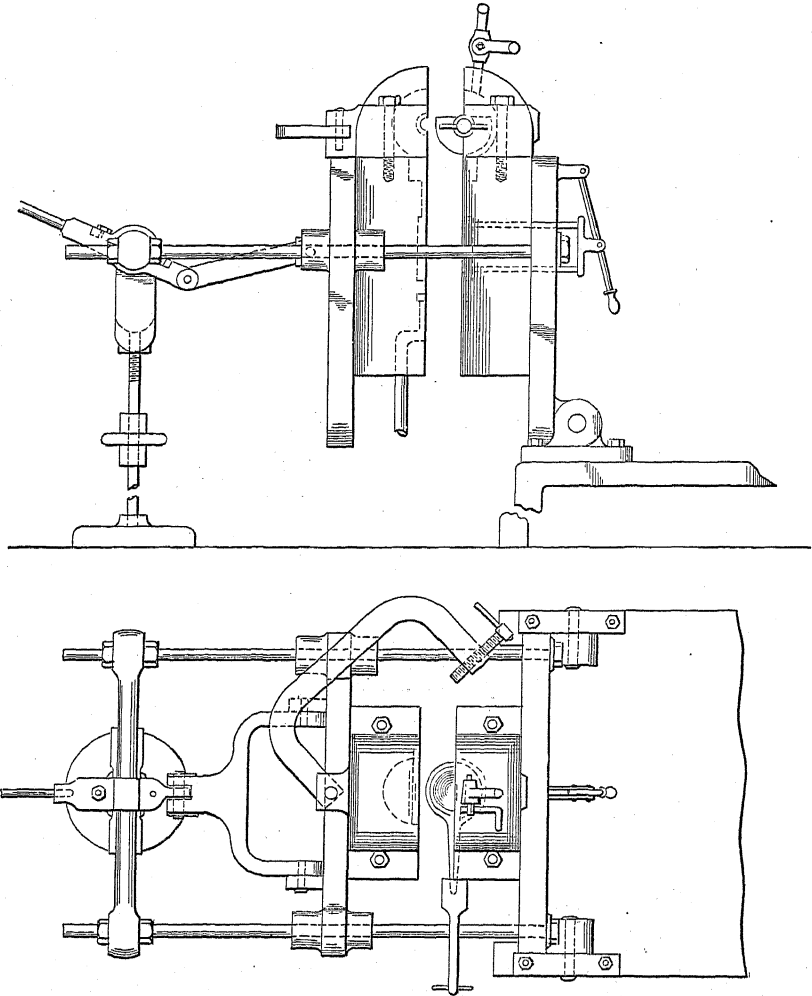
DOEHLER COMPRESSED-AIR MACHINE.
